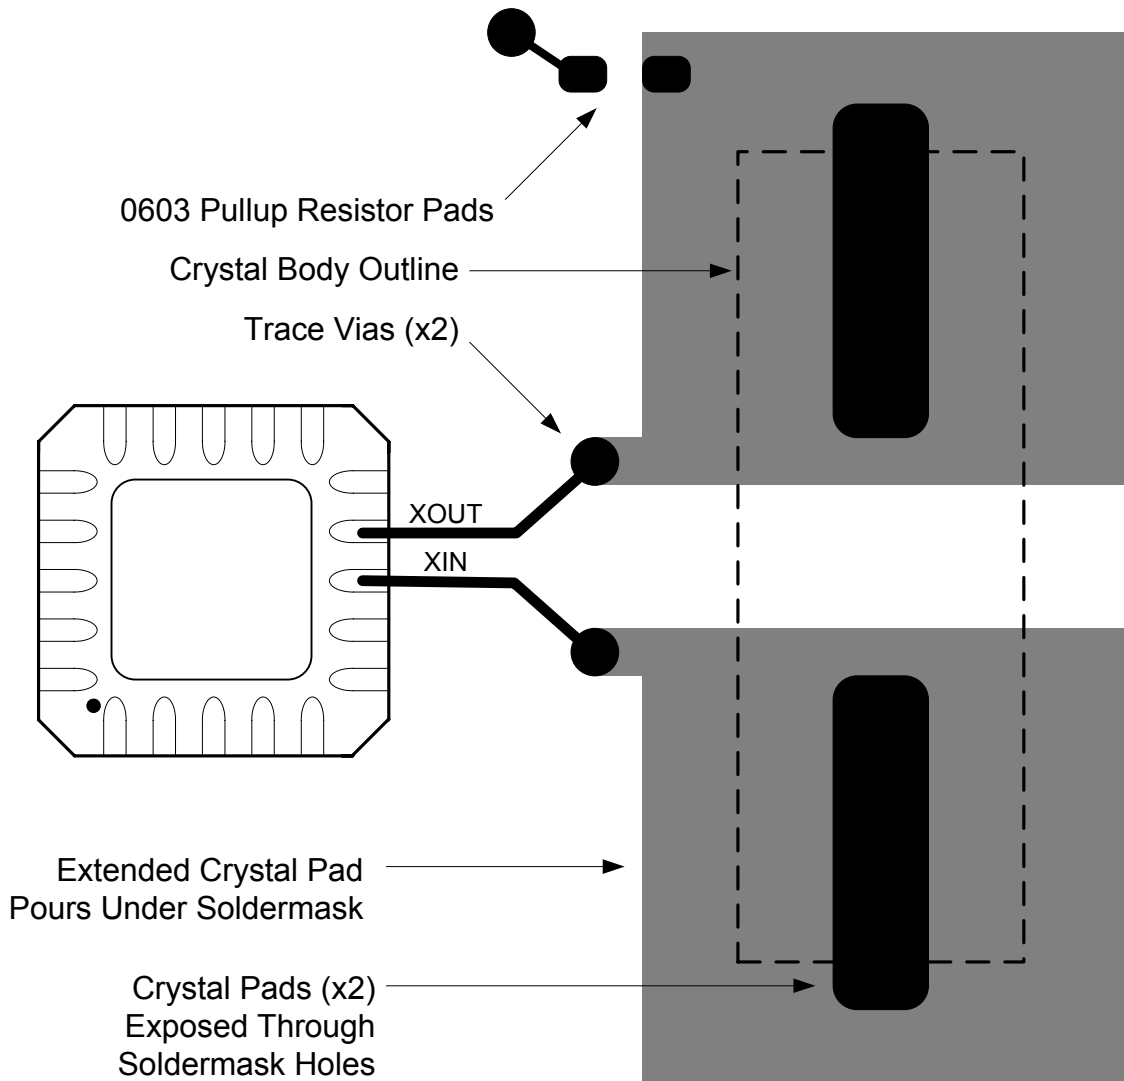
Two-Layer PCB Layout for Crystal (Top View)
